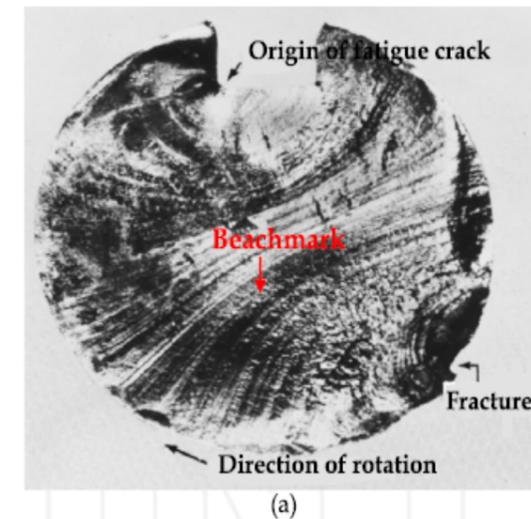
Fatigue fracture surface of a steel shaft
